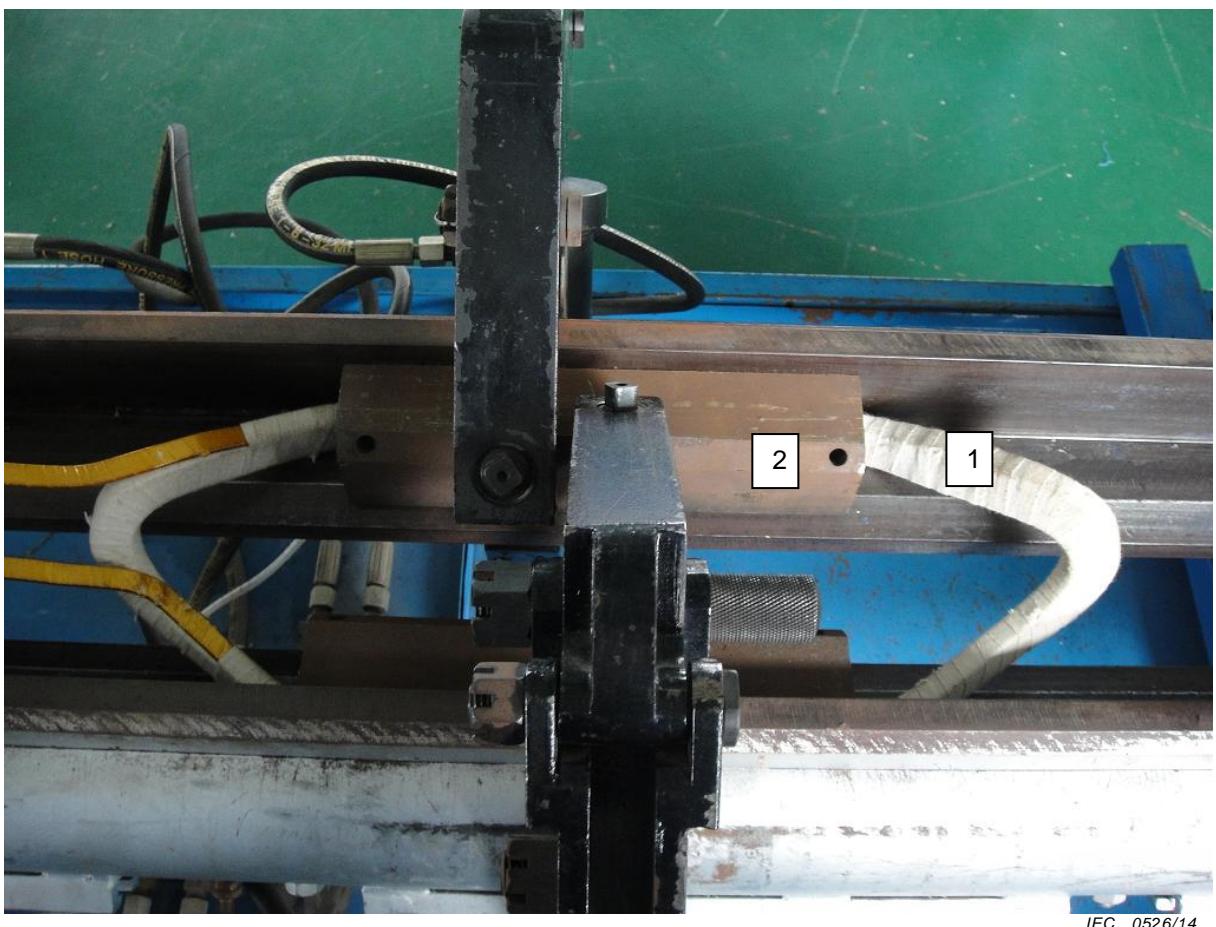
Coil forming machine stretches and bends oval coil to formed shape coil in the shaping apparatus
